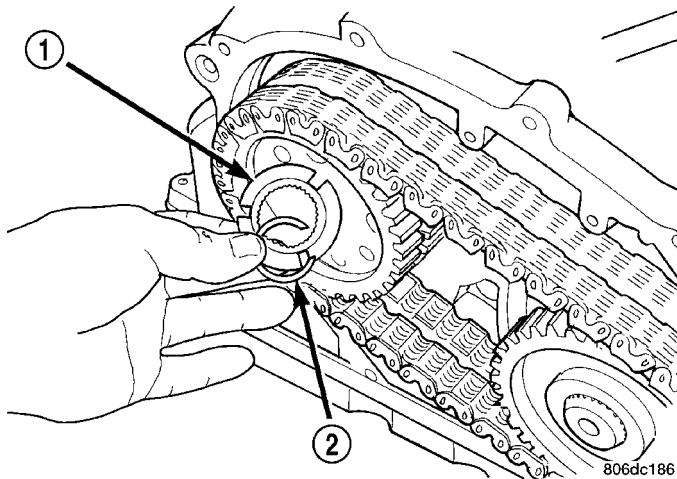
Remove Output Shaft Sprocket Snap Ring and Wave Washer
